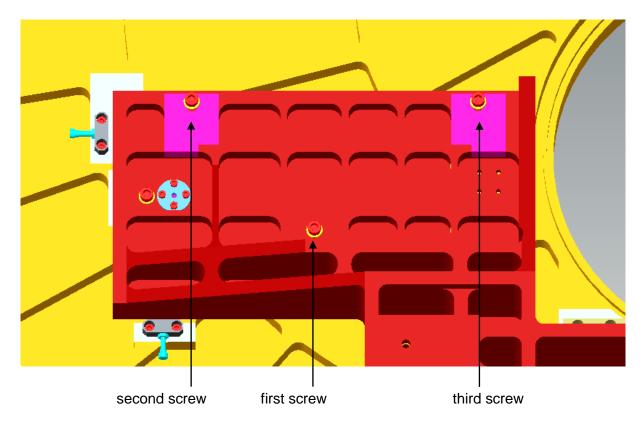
Sequence to tighten the screws of Cold Stop Wheel
